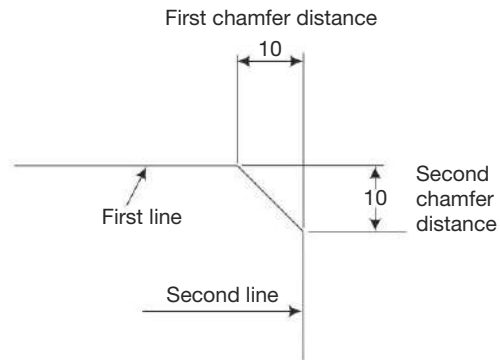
The meaning of chamfer distances in AutoCAD
